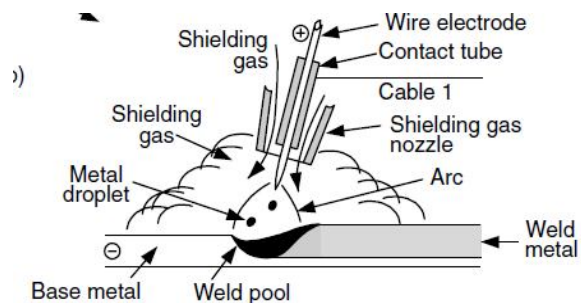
MIG Welding Process<sup>[2]</sup>
